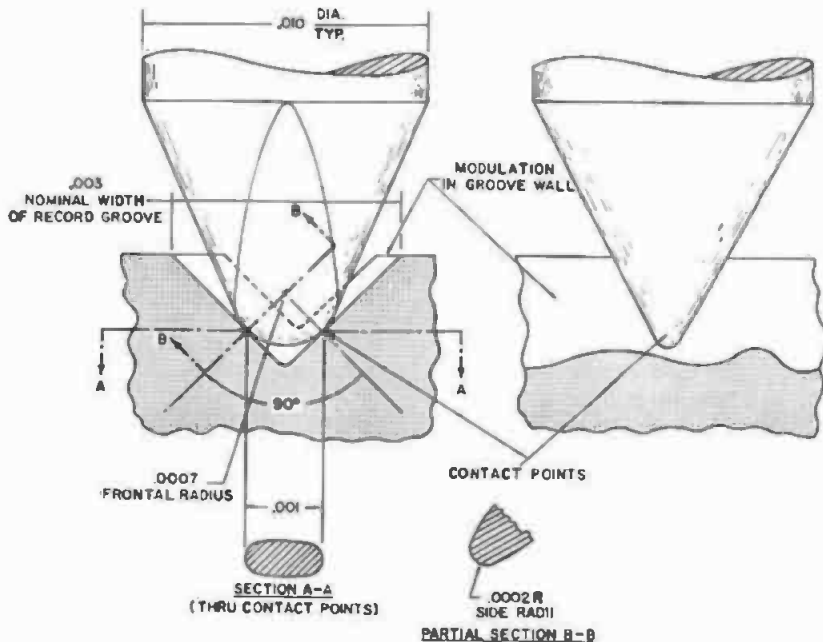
B. Bilateral-elliptical pickup stylus dimensions and radii. (Courtesy, Shure Brothers, Inc.)
